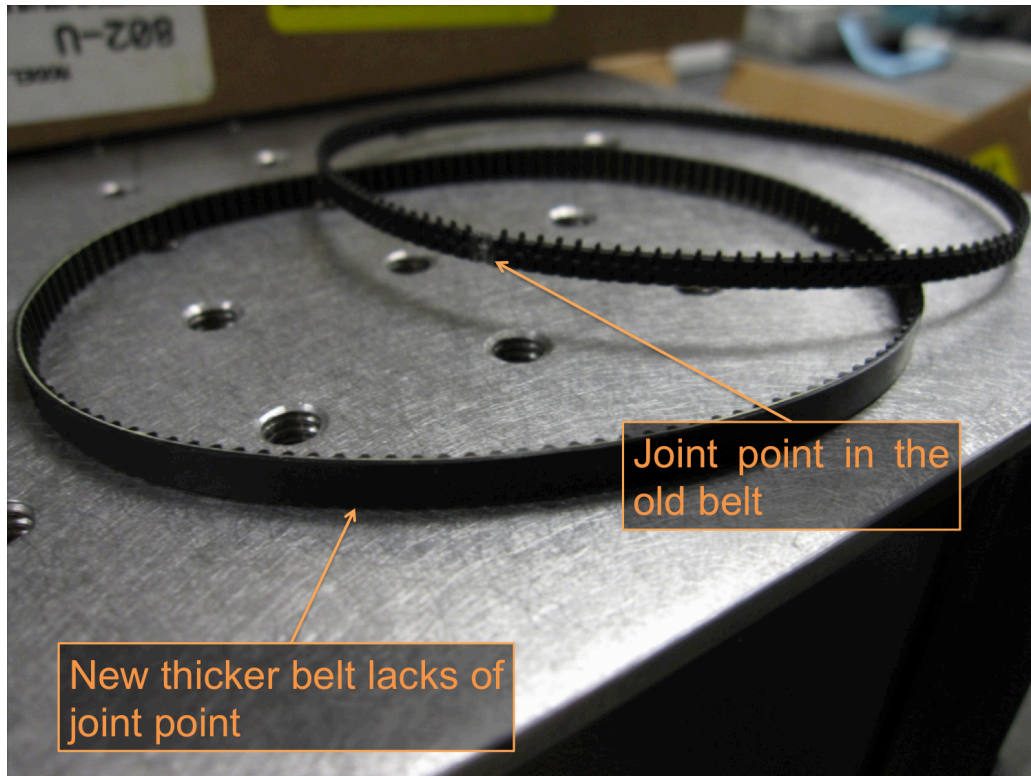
Comparison between the old and new drive belt. The new drive belt is thicker and does not have a joint point, which makes it stronger. Old belts tended to break at the joint point.
